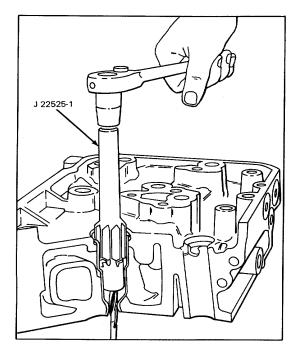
Reaming Injector Tube for Injector Body Nut and Spray Tip
